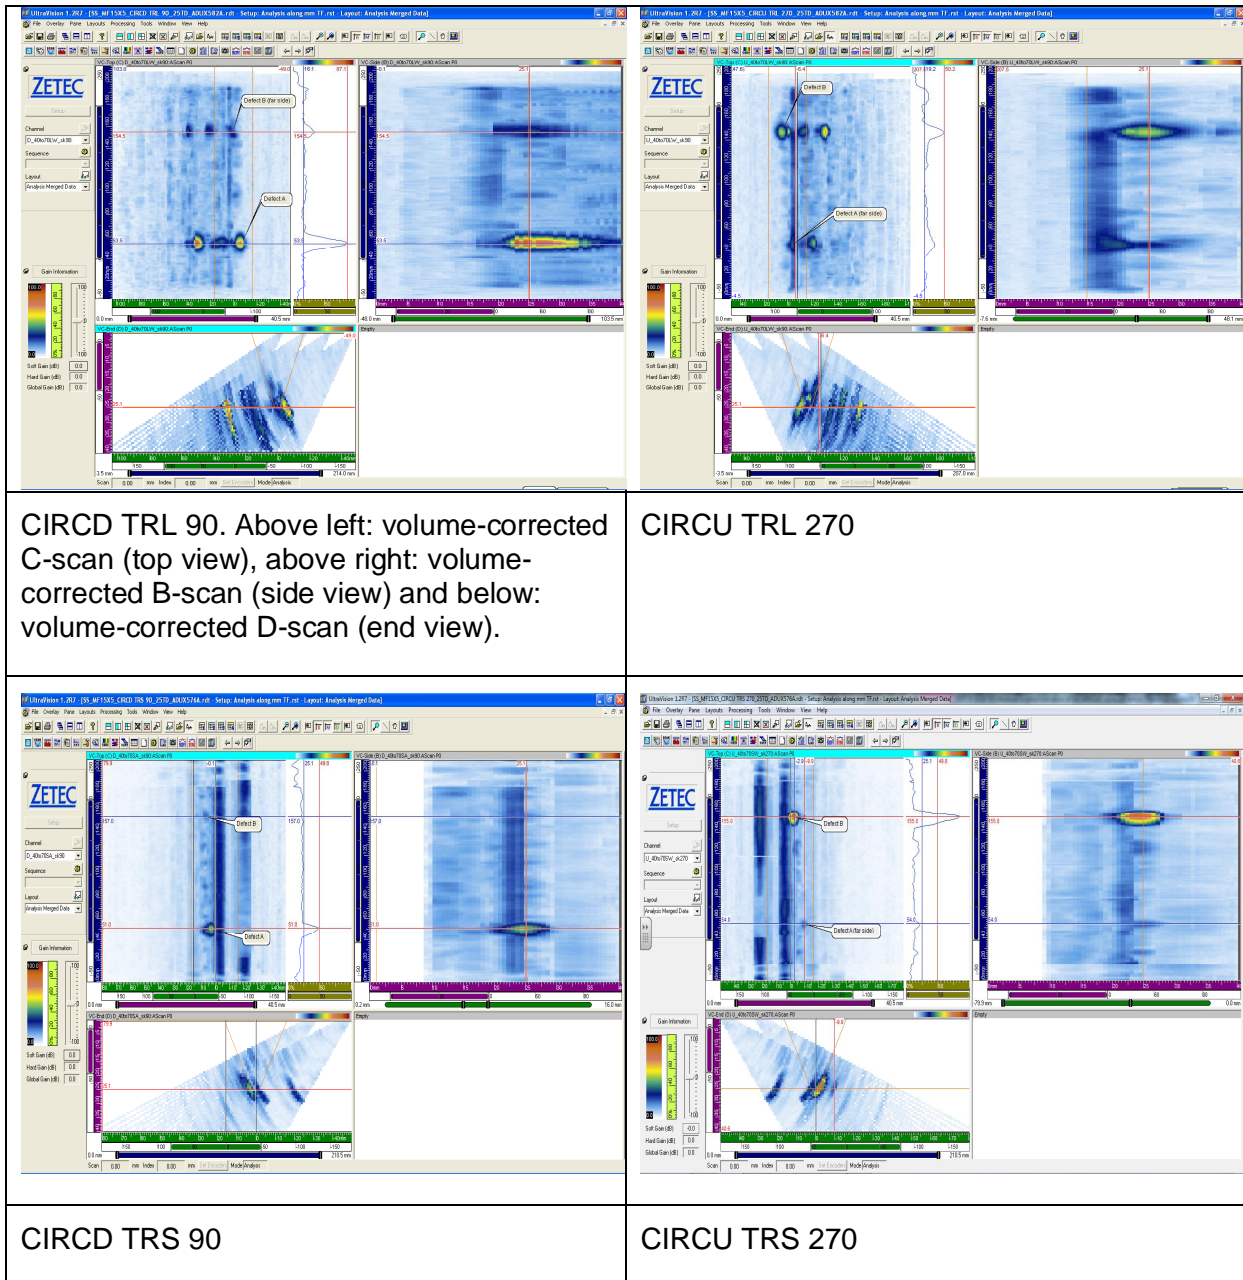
General views of weld MF scanned with technique PA-1.
